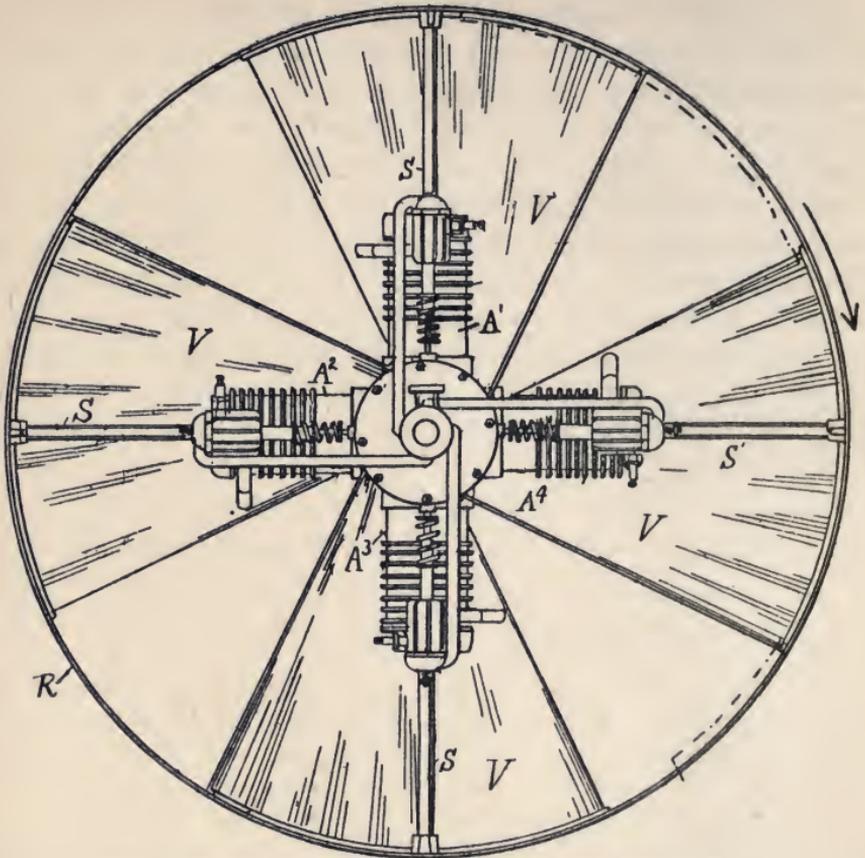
Harper's Engine, with Rotating Cylinders.
